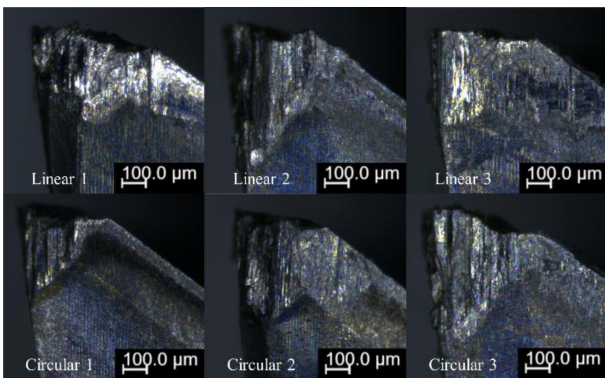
Maximum flank wear geometry of the tool in each experiment
